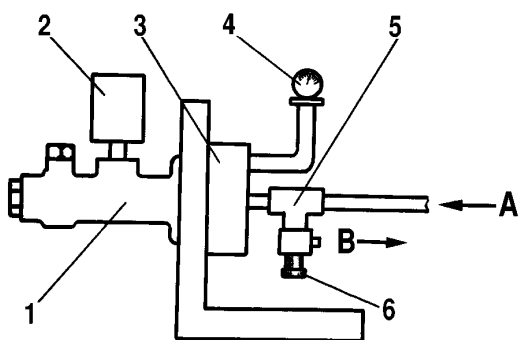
Checking the leak-proofness of the rear sealing ring:
